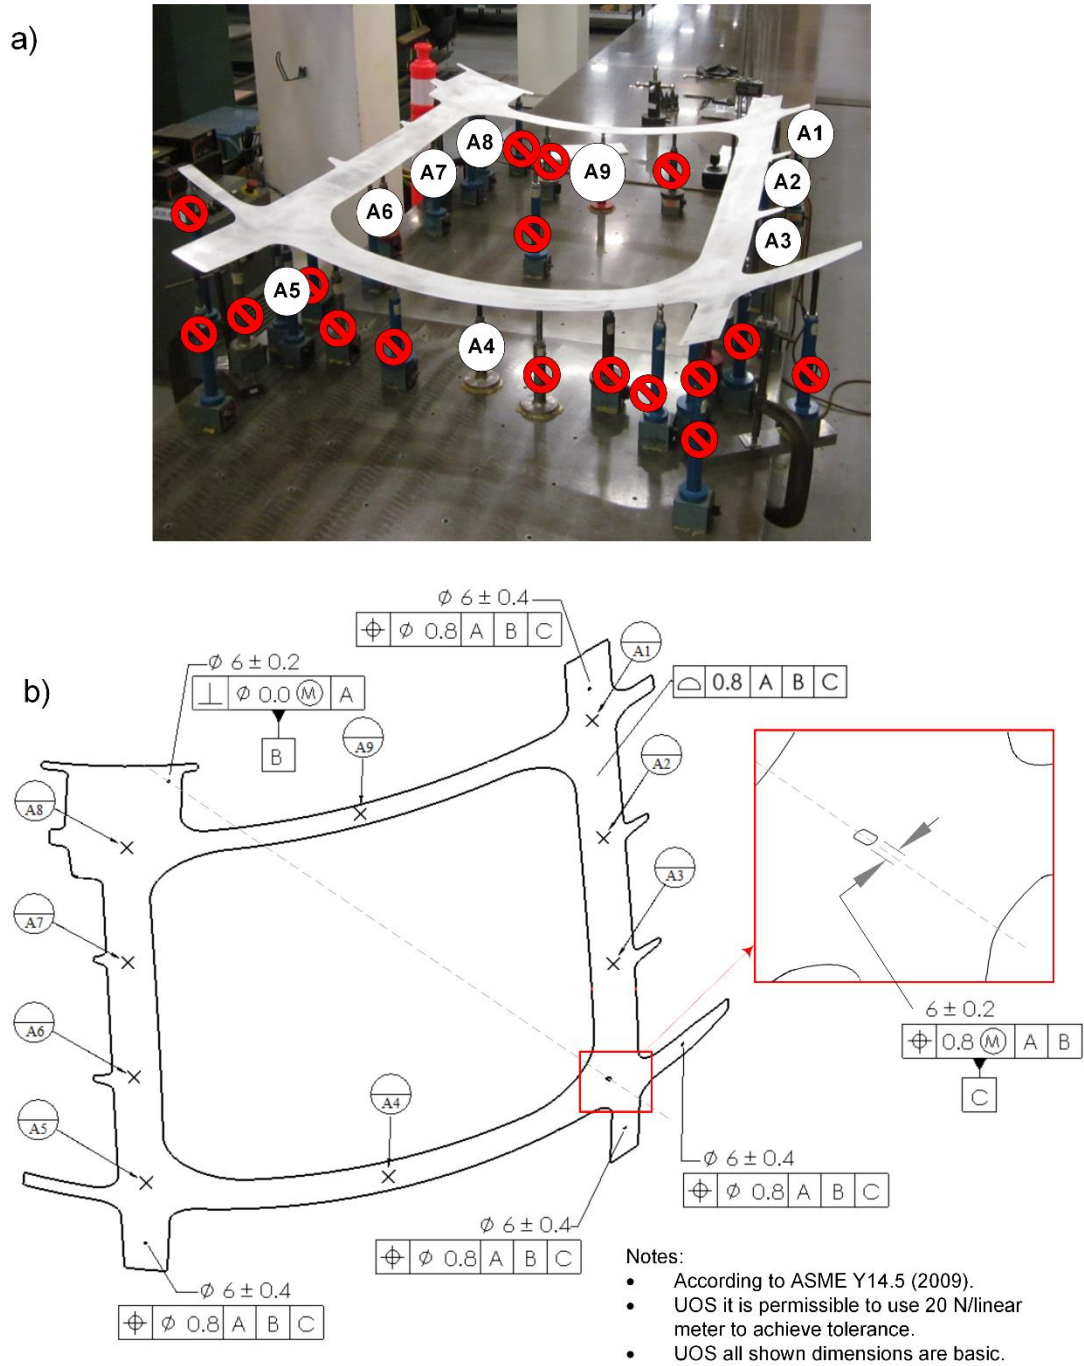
a) The manufactured part mounted on inspection fixtures where a real point cloud of scan mesh can be acquired, in our proposed method only 9 fixation features are kept as datums; b) GD&T specification for part B (dimensions are in mm).
